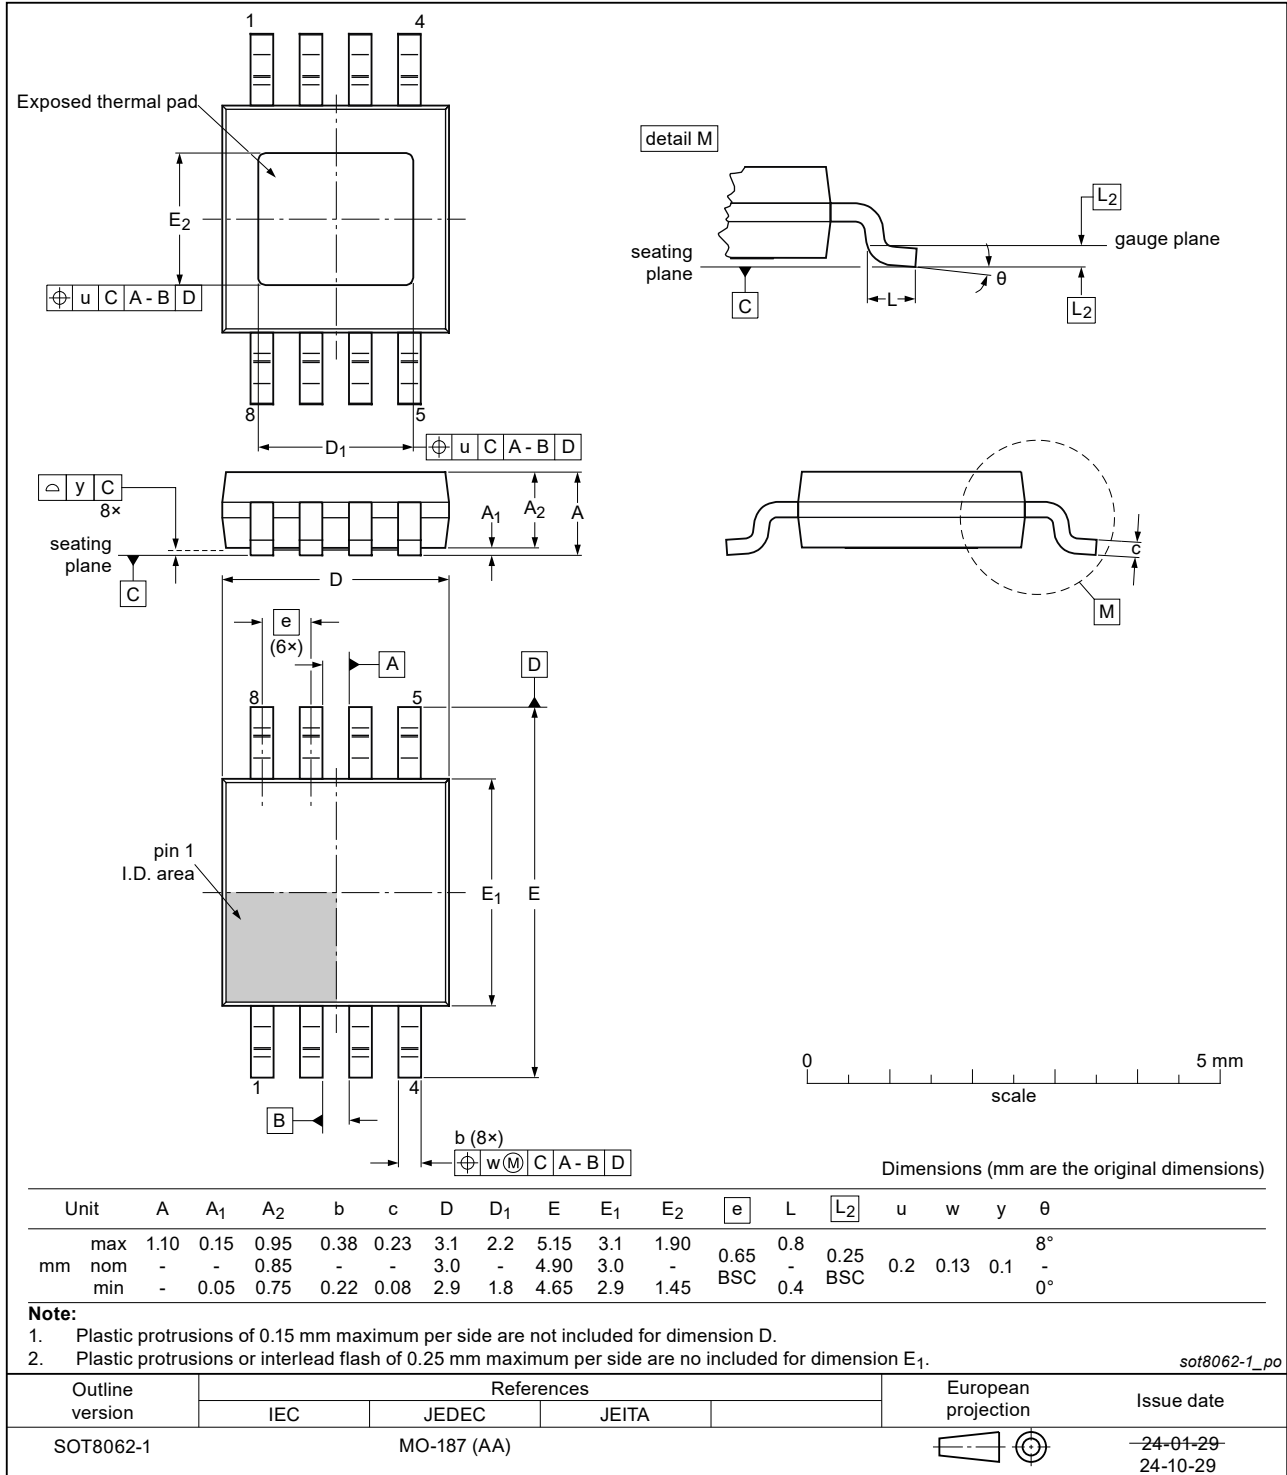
Package outline SOT8062-1 (HTSSOP8)
